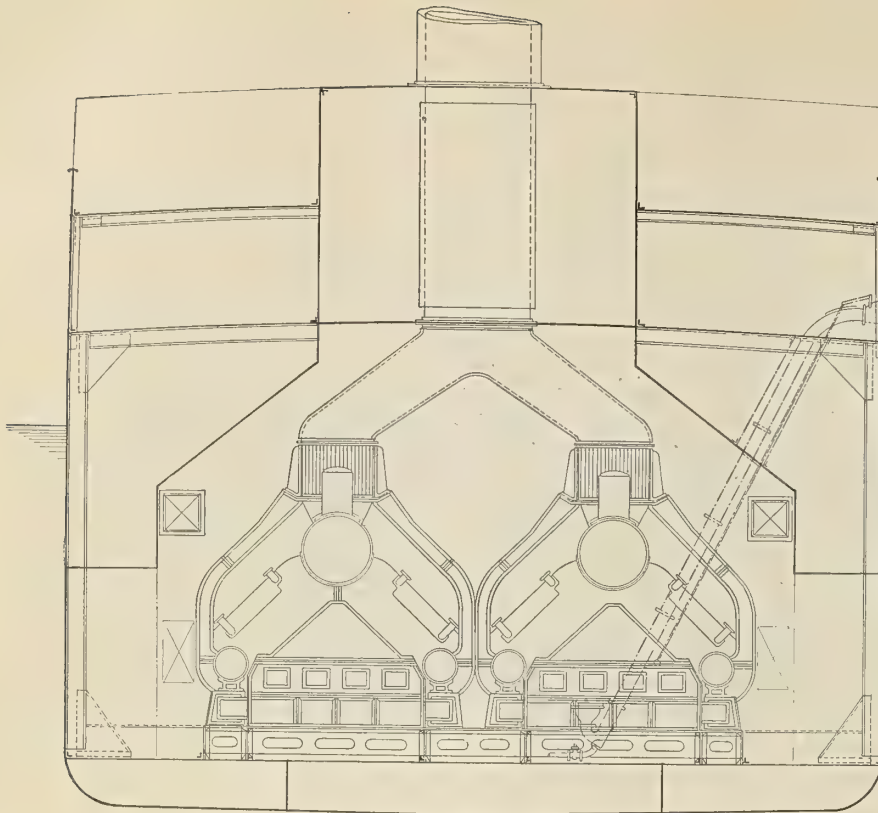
Section Through Boiler Room, 3,000 Horsepower Cargo Steamer
